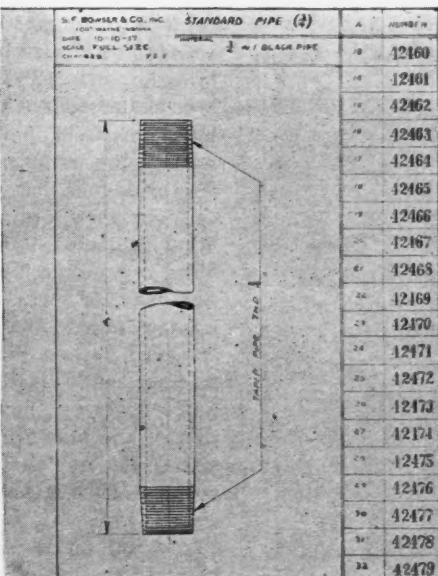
Drawing Numbers assigned to Parts of Standard Design where One Dimension is Variable
